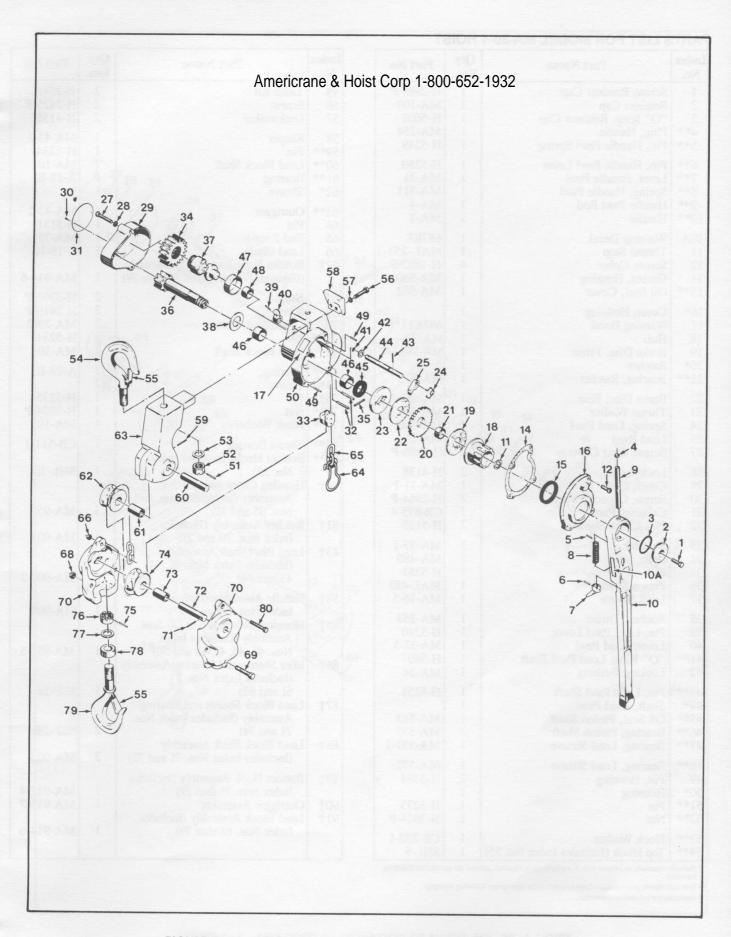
EXPLODED ILLUSTRATION OF MODEL MA-30-3 HOIST
